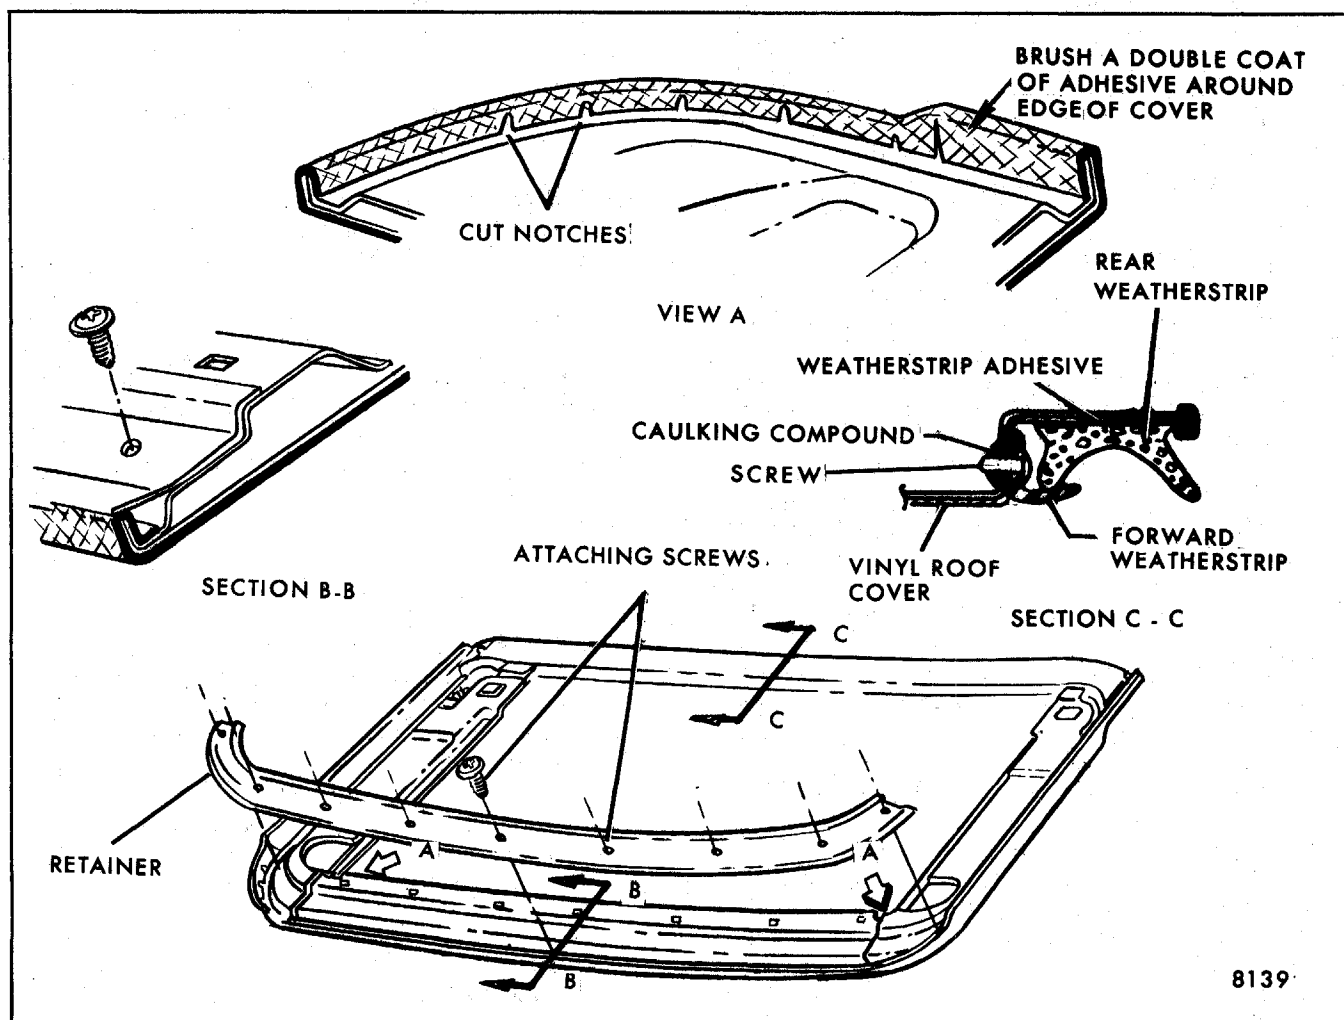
Fabric Roof Cover Installation on Sliding Sun Roof Panel (CA1 or CO3 Option)
